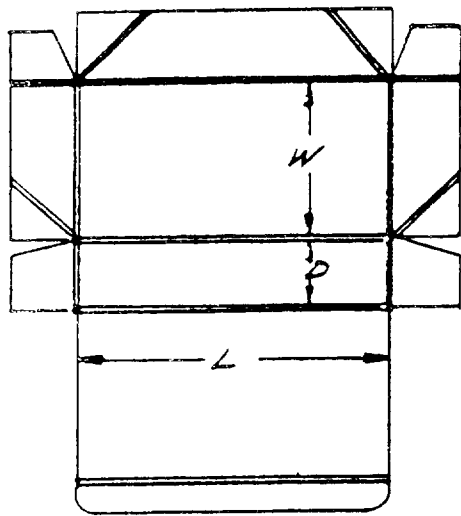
STYLE I, CRACKER STYLE LOCK END
